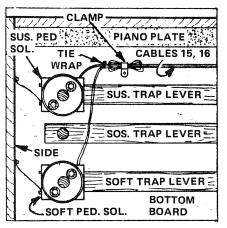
Cable Clamp mounted near the Pedal Solenoids.
